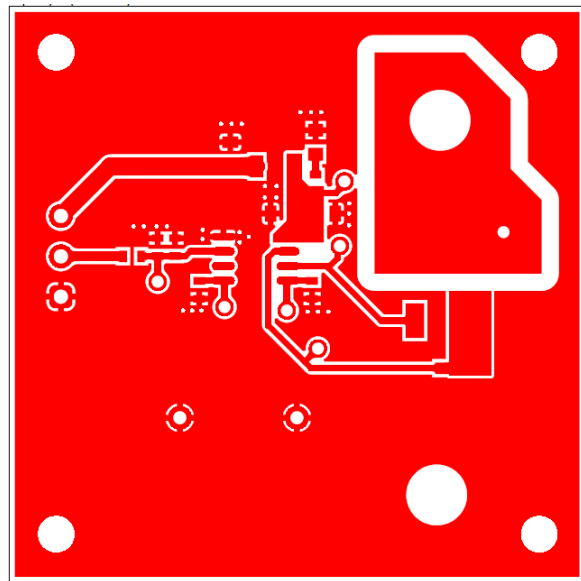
FAD1100EVB PCB Internal Plane 1 Drawing
